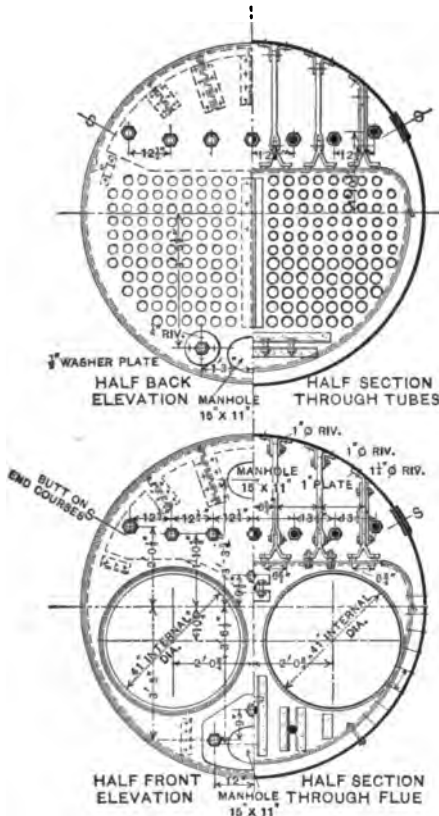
Admiralty or Gunboat Boiler. Sections of Fig. 24.
